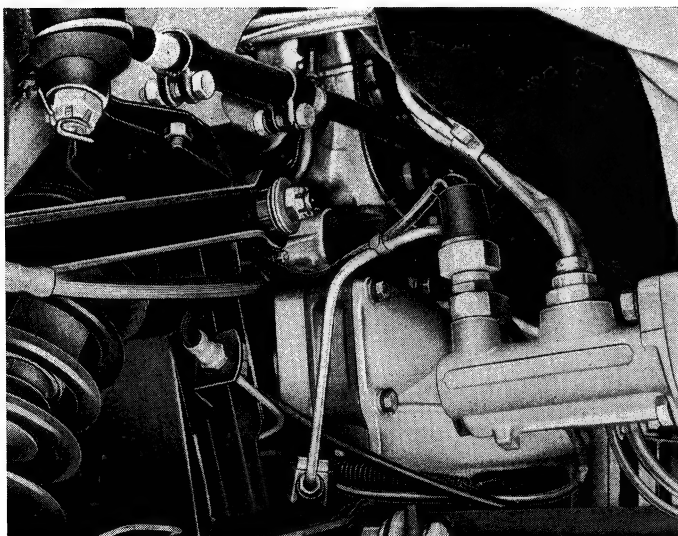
Detail showing 1600 S Cabriolet master cylinder.
